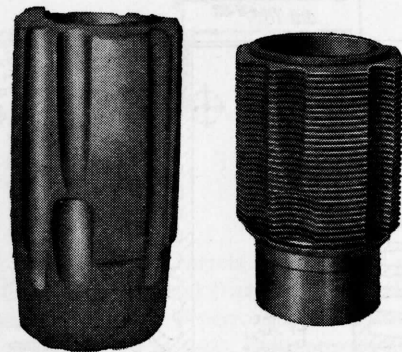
Cylinder of the Tatra 111 compression-ignition engine prior to and after machining.
